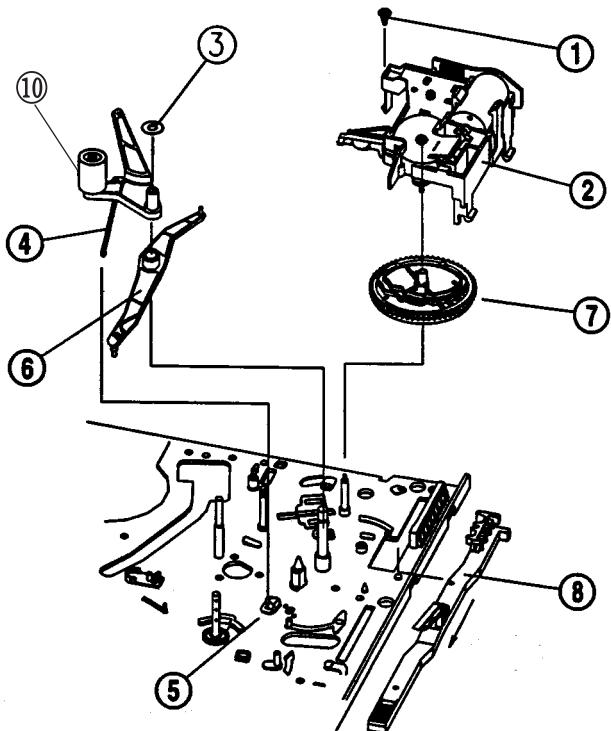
Replacement of L/C Bracket Total Assembly/Pinch Lever Total Assembly/cam Gear/Relay Lever/F/L Rack
